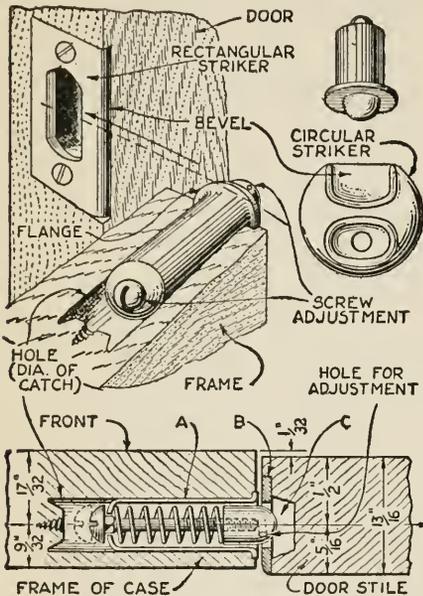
How a friction catch is inserted in a hole bored in the door frame and how the striker is fastened to the door.
